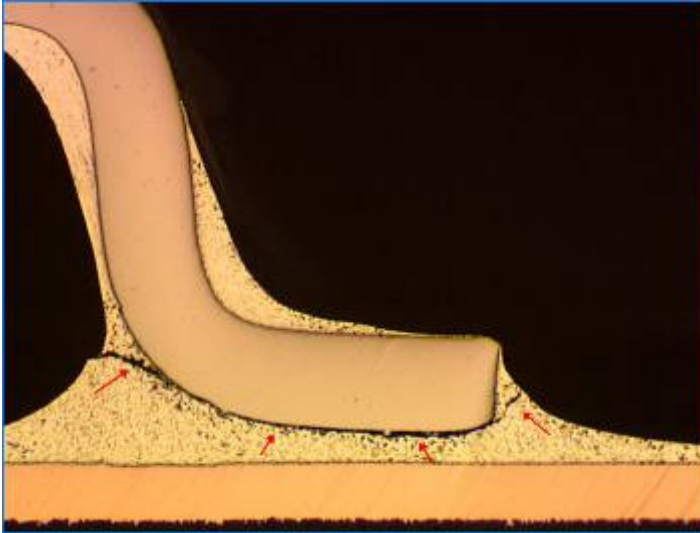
cross section, SN67, U61, right lead solder crack, 100x
